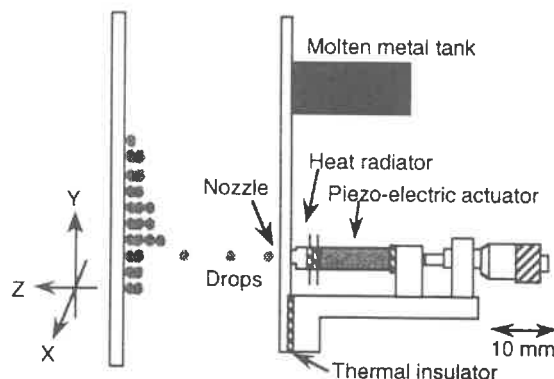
Schematic illustration of metal-jet head and principle of 3-dimensional forming
